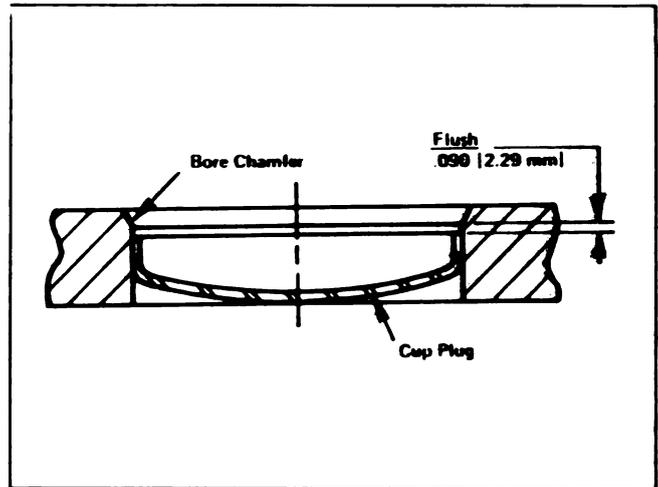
(N102109). Cross-Section Of Cup Plug Installed In The Cylinder Head.
